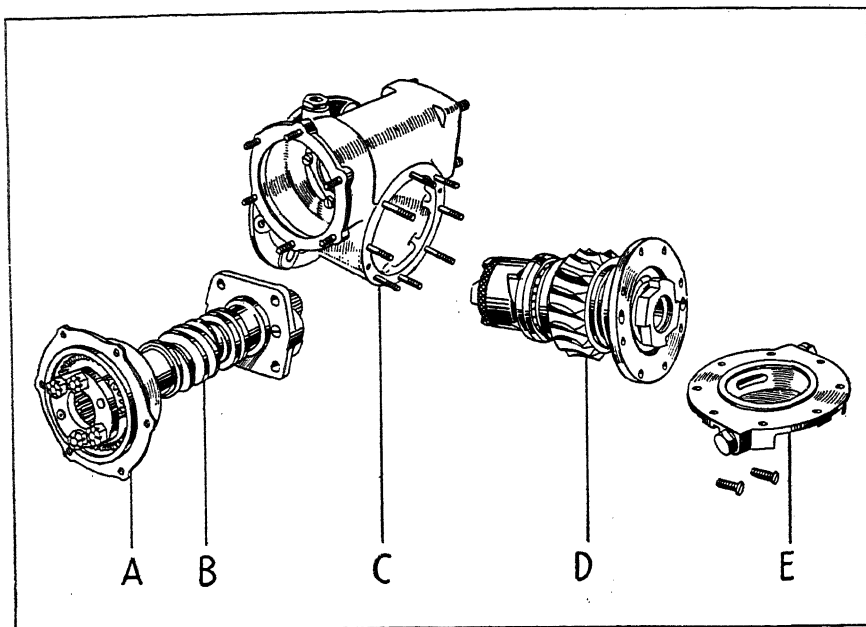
ARMSTRONG SIDDELEY GEAR-BOX TO WHICH MOTOR SHOWN IN FIG. 1 IS APPLIED
